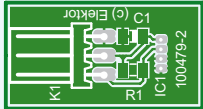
A small PCB simplifies the job of fitting the sensor to the gearbox.
